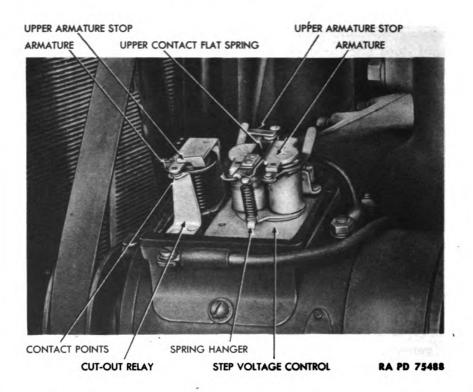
Compressor Unit Generator Control Unit — Cover Removed
